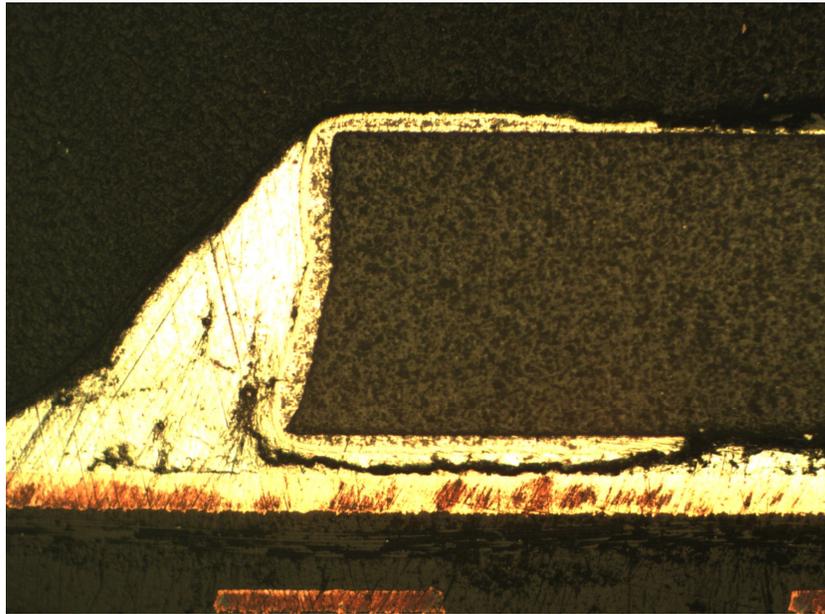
Hot Melt 2 on FR4 Test Board 2512 Resistor Image
